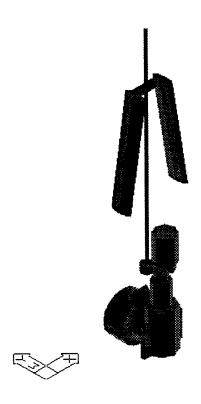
Thunder Tiger Engine, Starter Motor, Propeller Shaft, and Propeller
